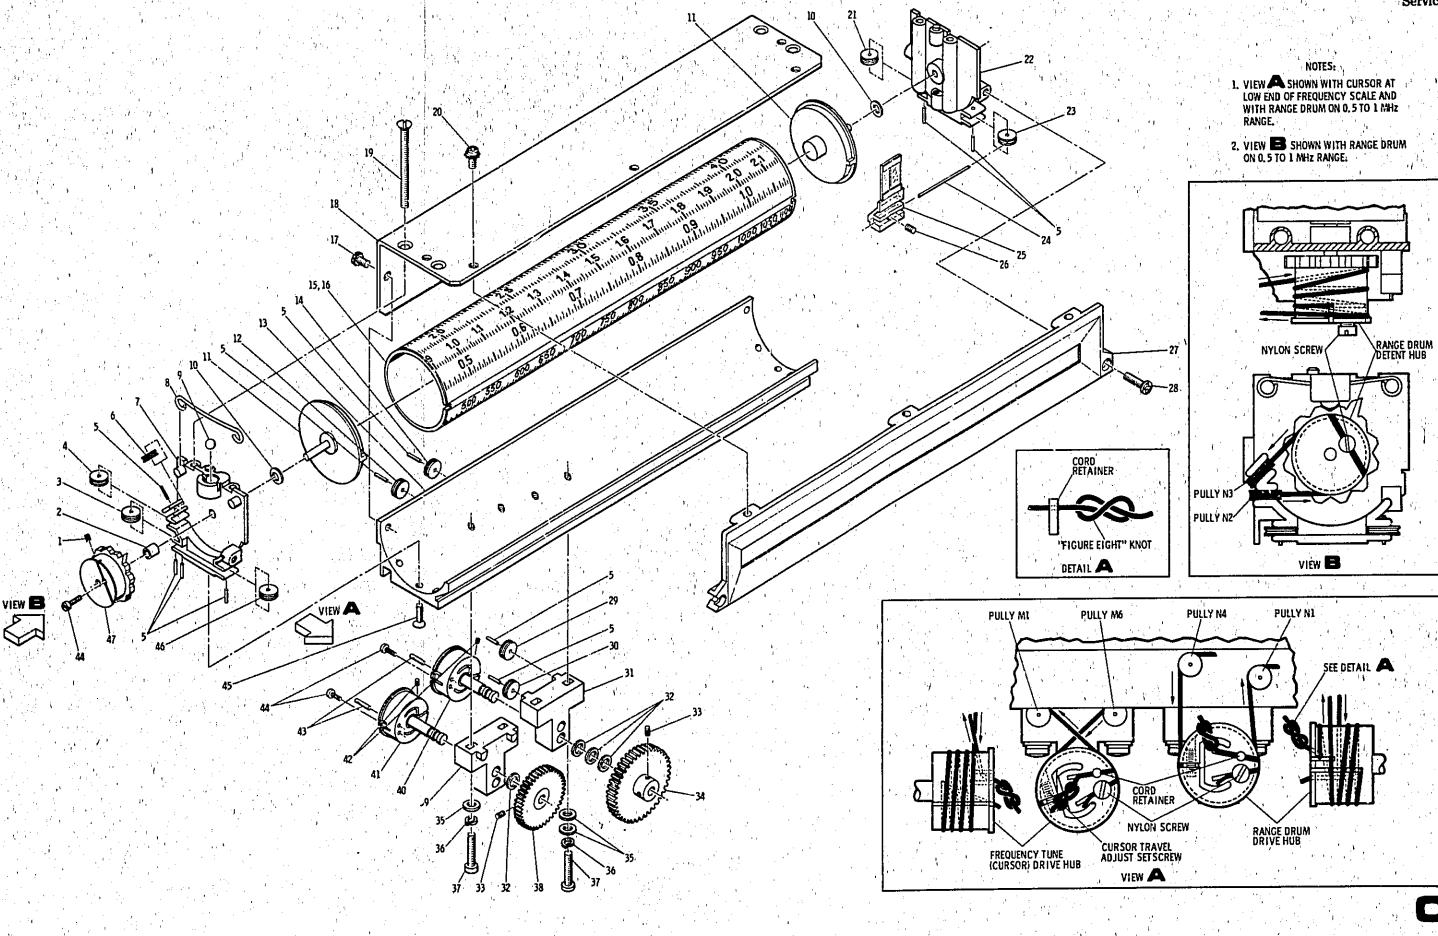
A8 Mechanical Dial Assembly Illustrated Parts Breakdown
